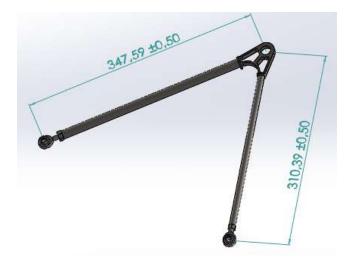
Front Upper Control Arm assembly (XDRI)
